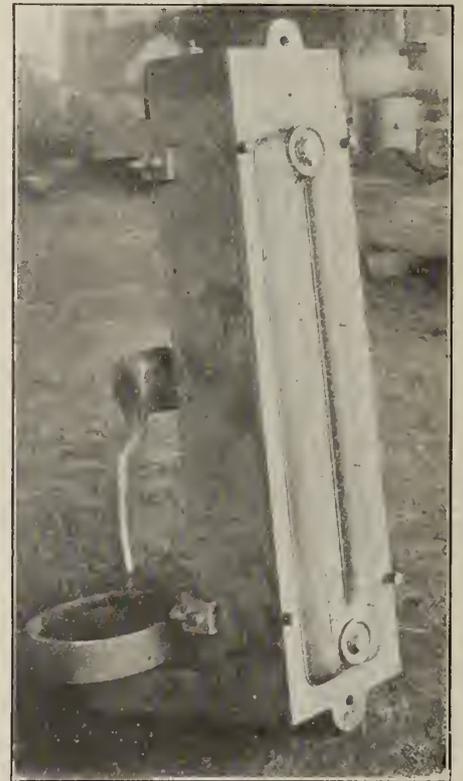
MOLDING MACHINE FOR RADIATOR SECTIONS.
